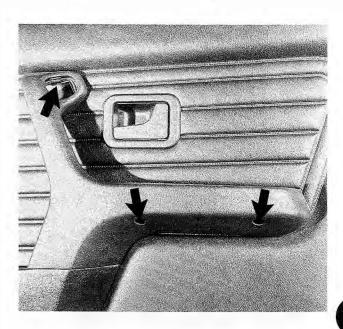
Front armrest screws to be removed (arrows). Upper screw is behind trim piece or power mirror switch, which should be pried out.
